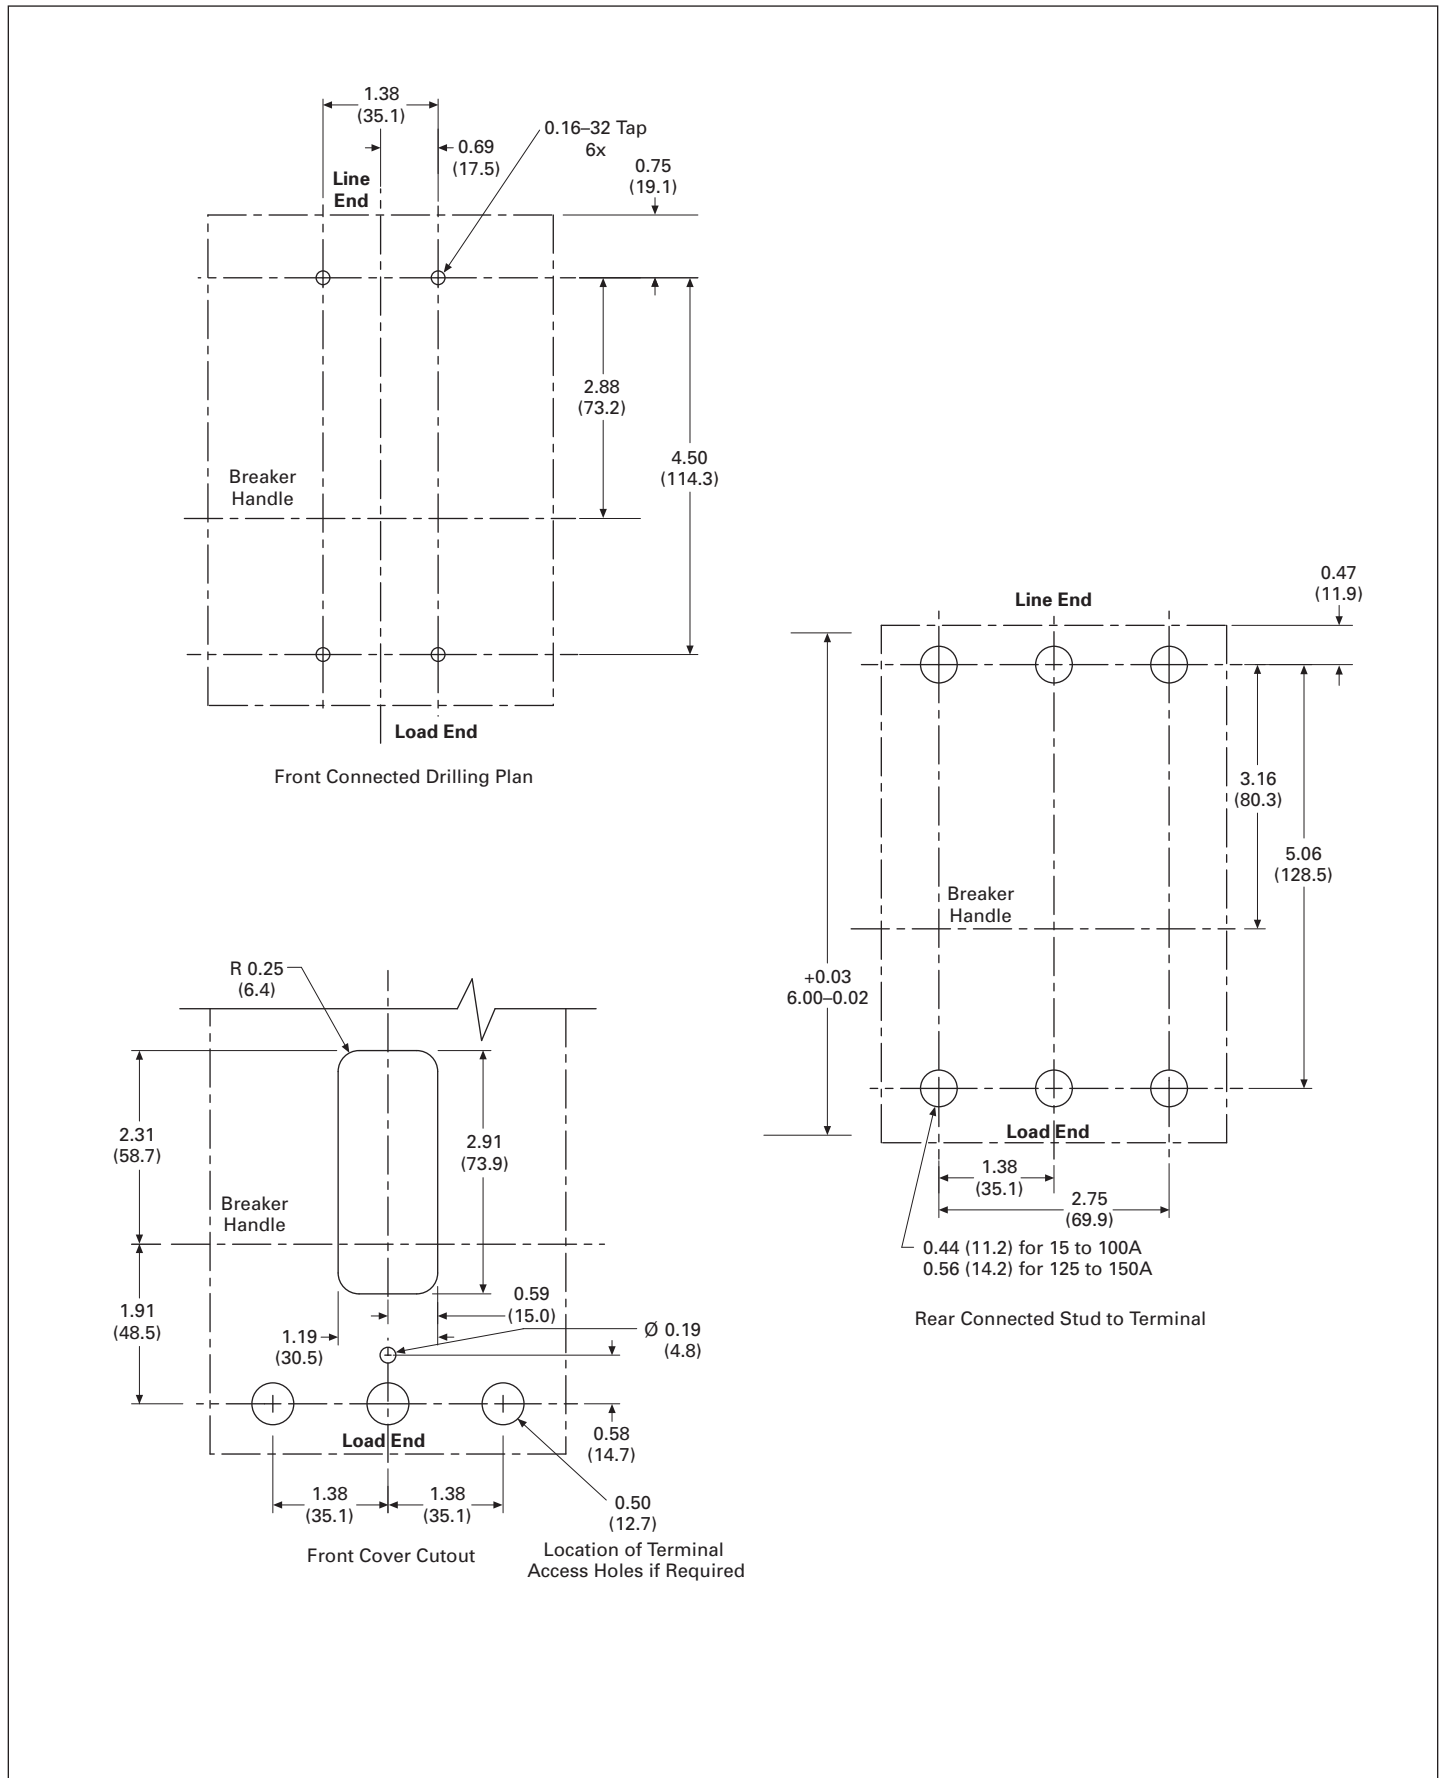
Type FG 15-225A Three-Pole Cutout and Drilling Plan—Dimensions in Inches (mm)
